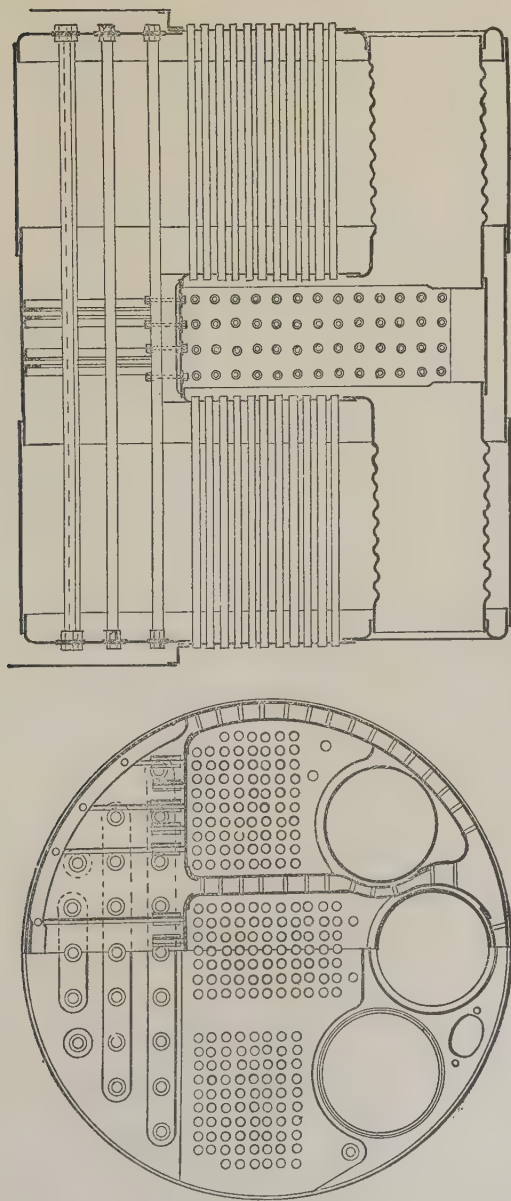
A.—Double-ended Boiler (Fox's Furnaces).
